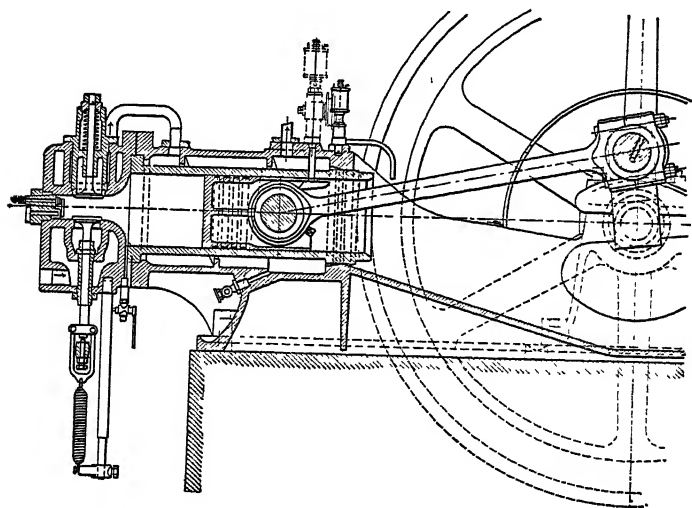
Sectional elevation of Bollinckx gas-engine.
